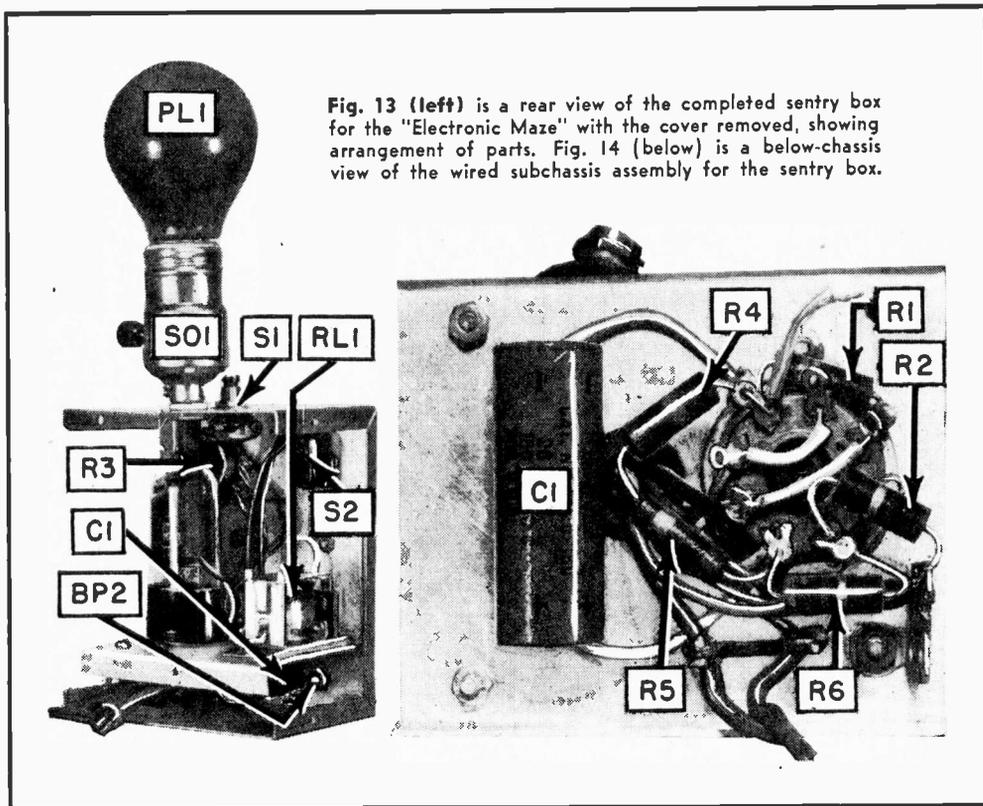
(left) is a rear view of the completed sentry box for the "Electronic Maze" with the cover removed, showing arrangement of parts. Fig. 14 (below) is a below-chassis view of the wired subchassis assembly for the sentry box.
